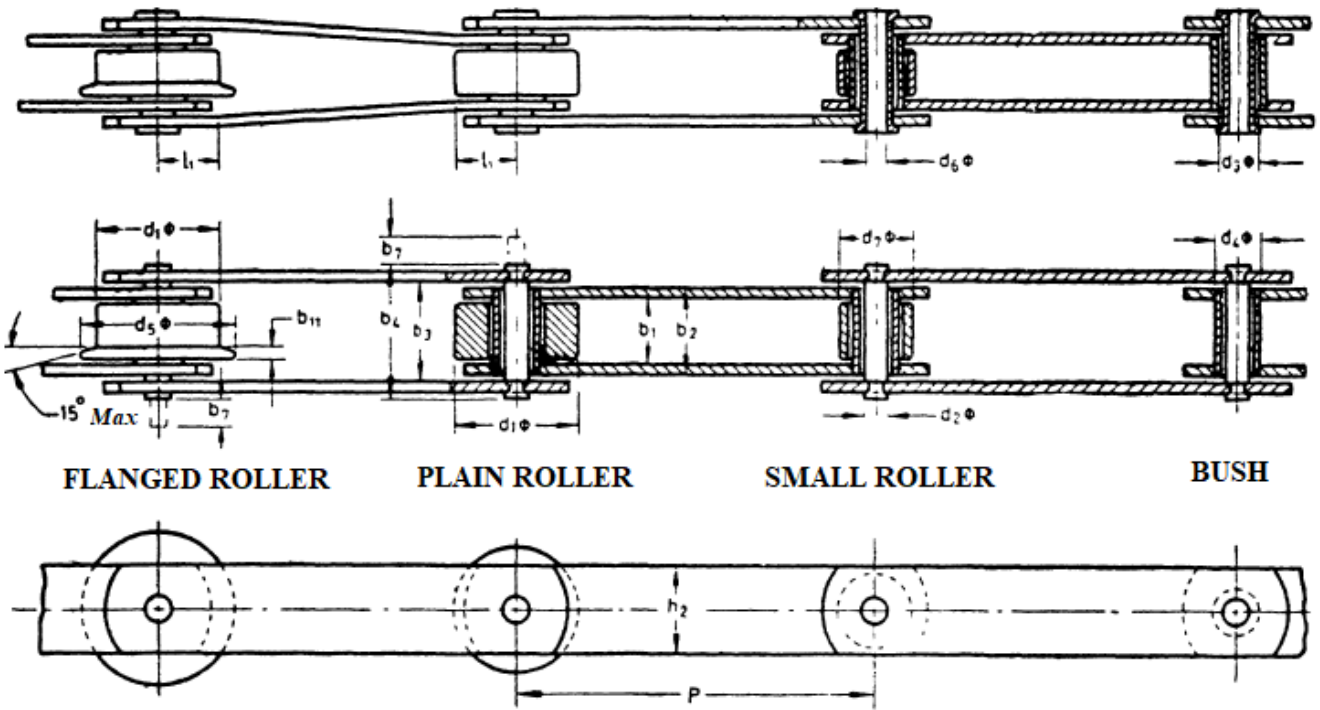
DIMENSIONS FOR SOLID PIN AND HOLLOW PIN CONVEYOR CHAINS
